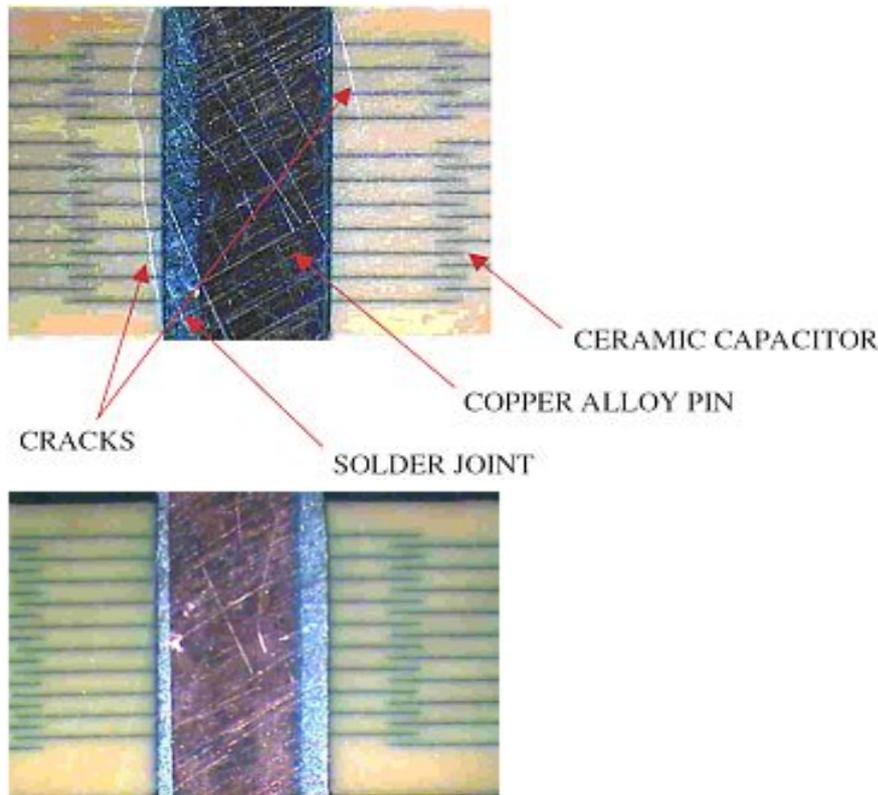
Defect capacitor soldered with SnPb36Ag2 lead-free solder (top) and correctly soldered with 50PbIn solder (bottom) [2]
